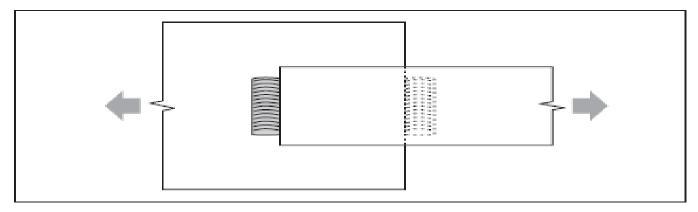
Lap joint with fillet welds loaded perpendicularly.
